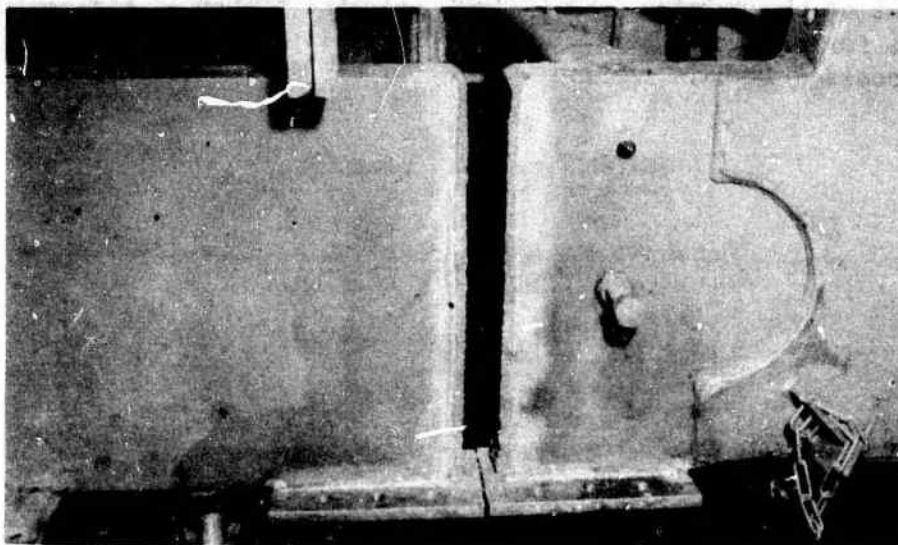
CUT READY FOR BUTT-PLATE (SECONDARY UNIT)
